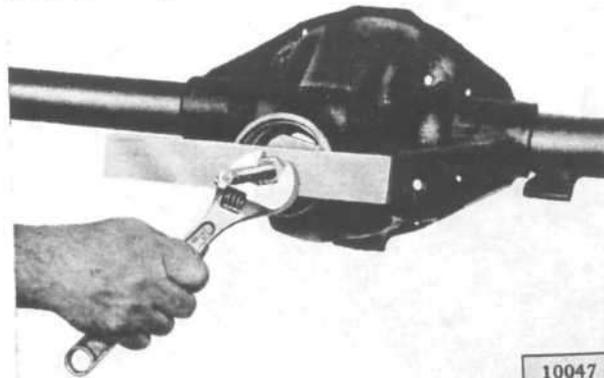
PULLING PINION SHAFT FRONT BEARING CUP
